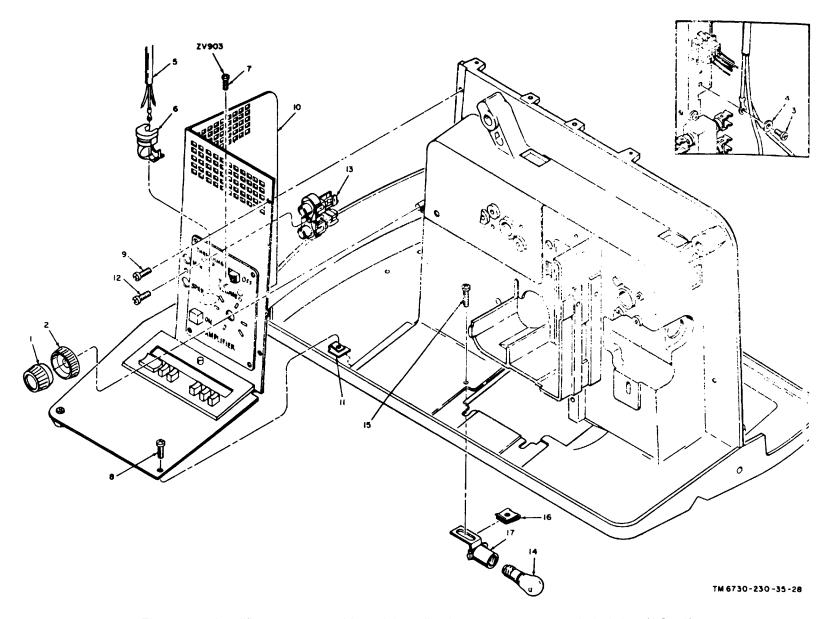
Amplifier cover assembly and threading lamp components exploded view (AQ-9A)
